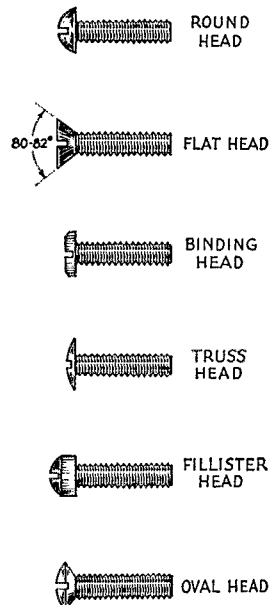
Various types of machine screws frequently used in assembling amateur gear.
